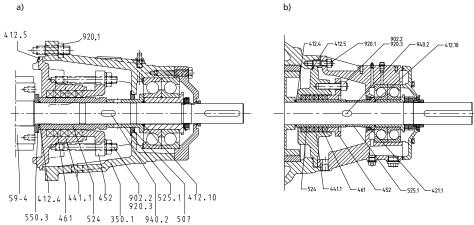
Removing the gland packing: a) sizes 32-200 and b) size 250
